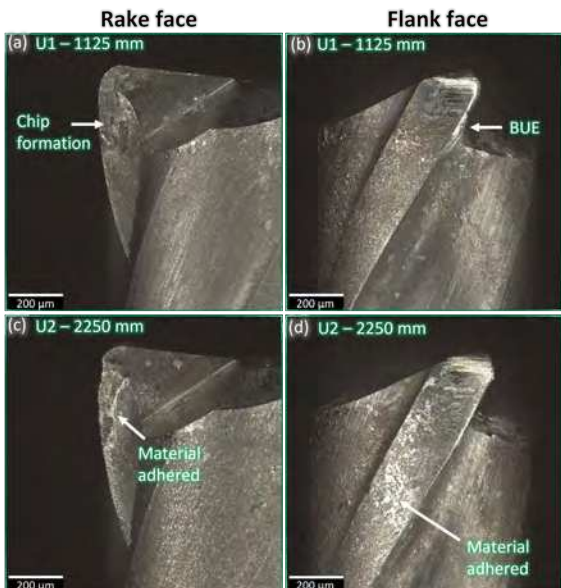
Rake and flank face of the uncoated tools in different stages of machined length.
